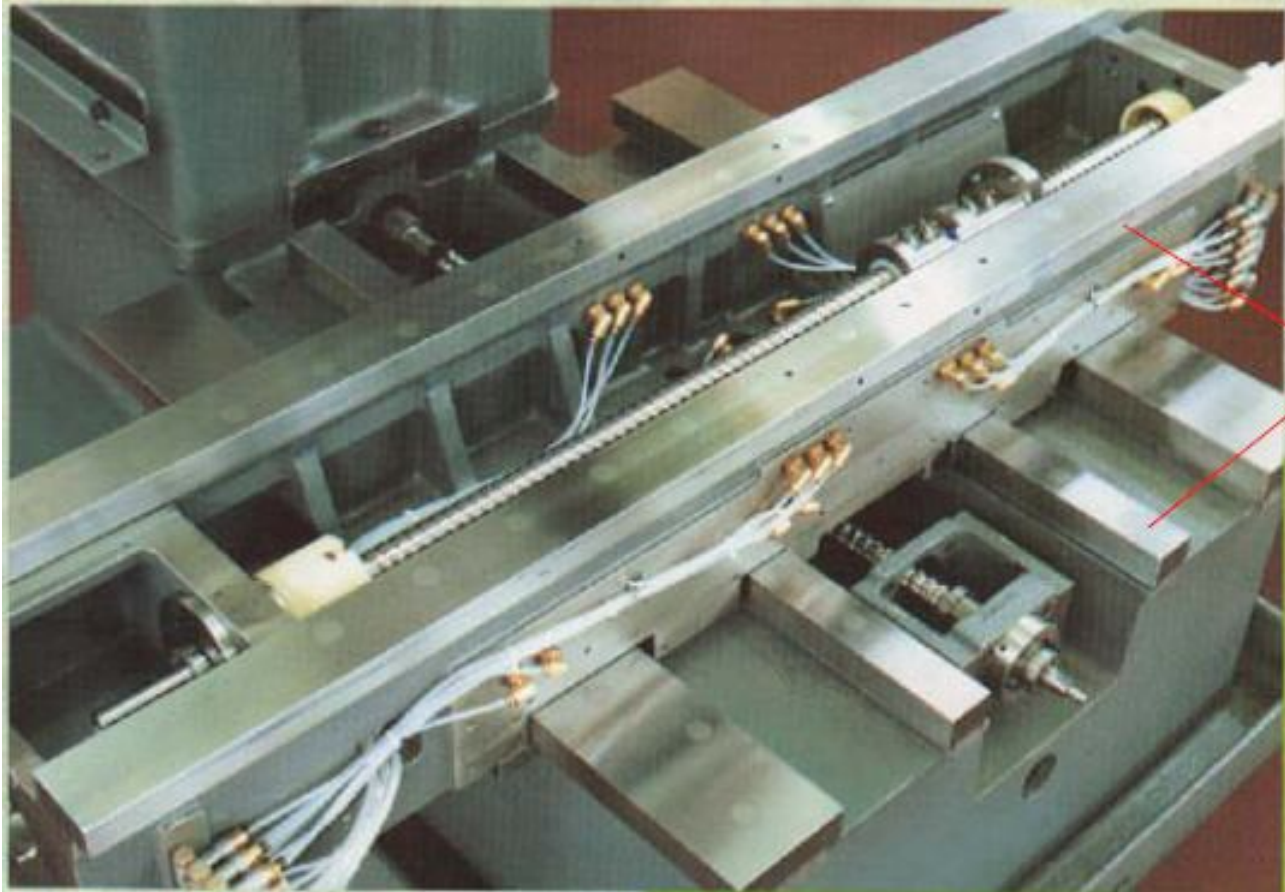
Use of recirculating ball screw and the LM device for axis movement in the bed of a CNC machine tool (Courtesy Makino Milling Machines Co. Ltd., Tokyo, Japan)
